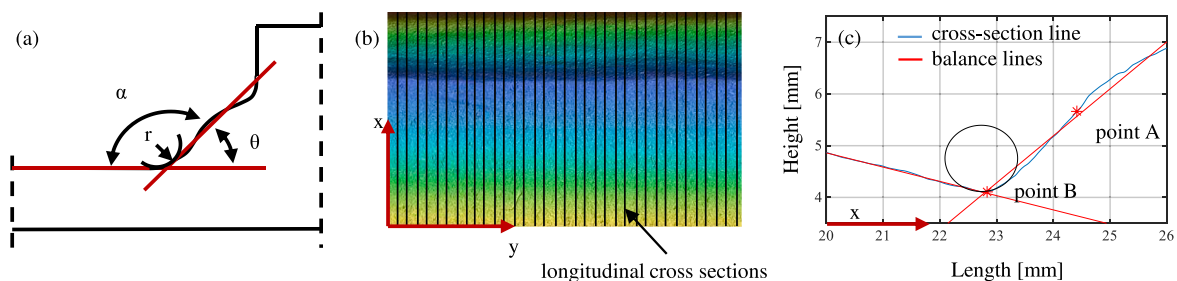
(a) Geometrical weld parameters according ISO 5817 [12], (b) longitudinal cross sections through weld seam, and (c) evaluation of geometrical parameters in the MATLAB tool.
